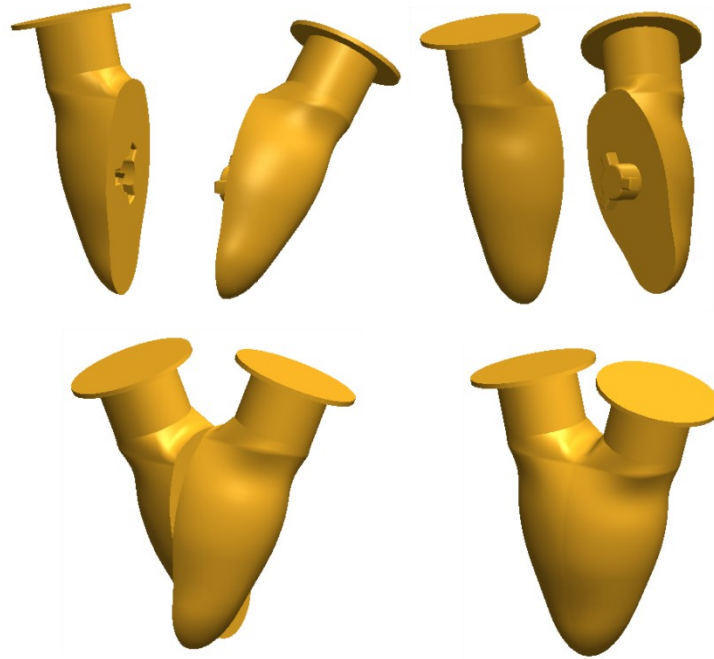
Mold used for brushing of the silicone. The mold is made of two symmetric parts with a slot on one such that the other one can fit into it and clamp. This is done so the silicone can be removed from the mold without tearing. The two top images show the two halves separated. The lower left image shows the two parts connected by introducing the protruding part into the slot. The lower right image illustrates the two parts combined and aligned for the molding of the ventricle.
